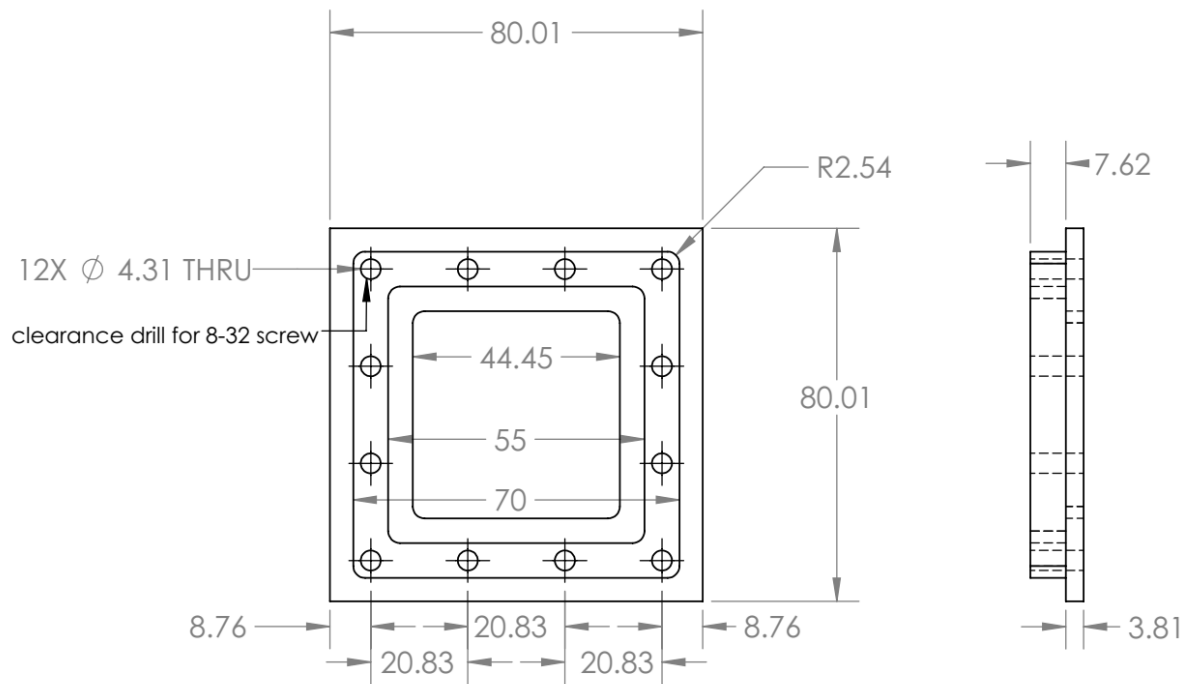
Technical drawing of the glass cover on the top chamber wall, made from PEEK. All the dimensions are in millimeters.
